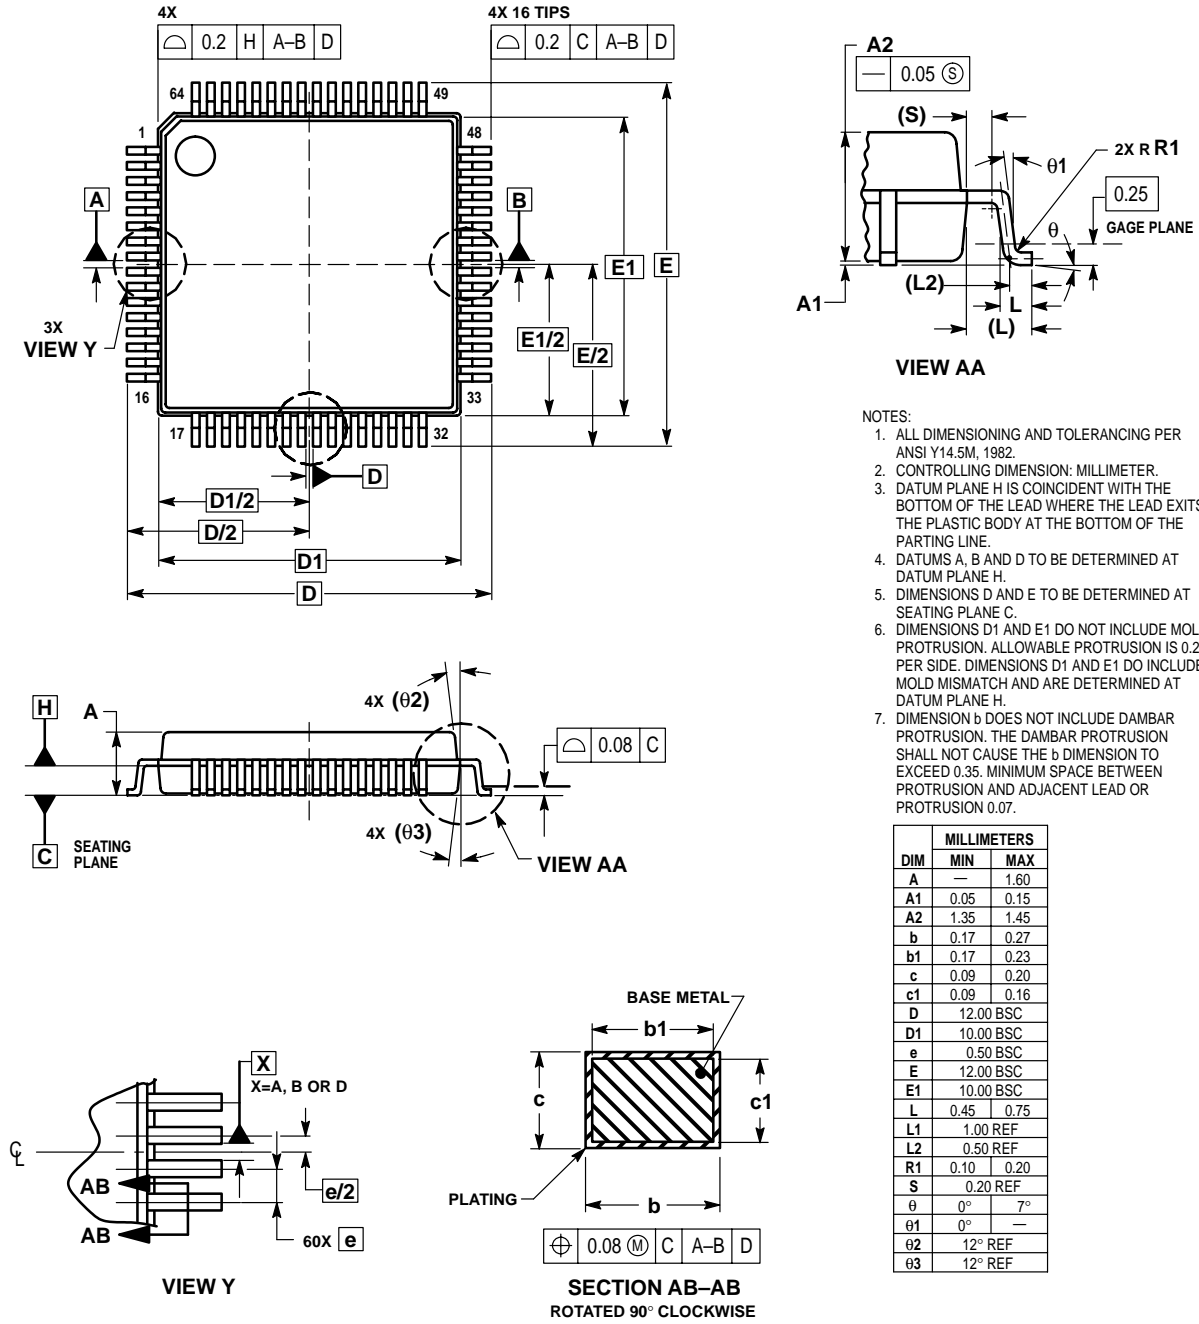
64-pin LQFP mechanical dimensions (case no. 840F)
